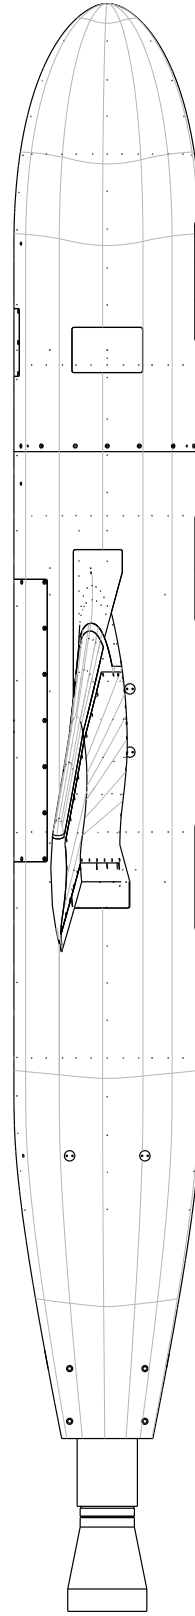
Starboard-side view of the wing-fuselage junction model assembly.
